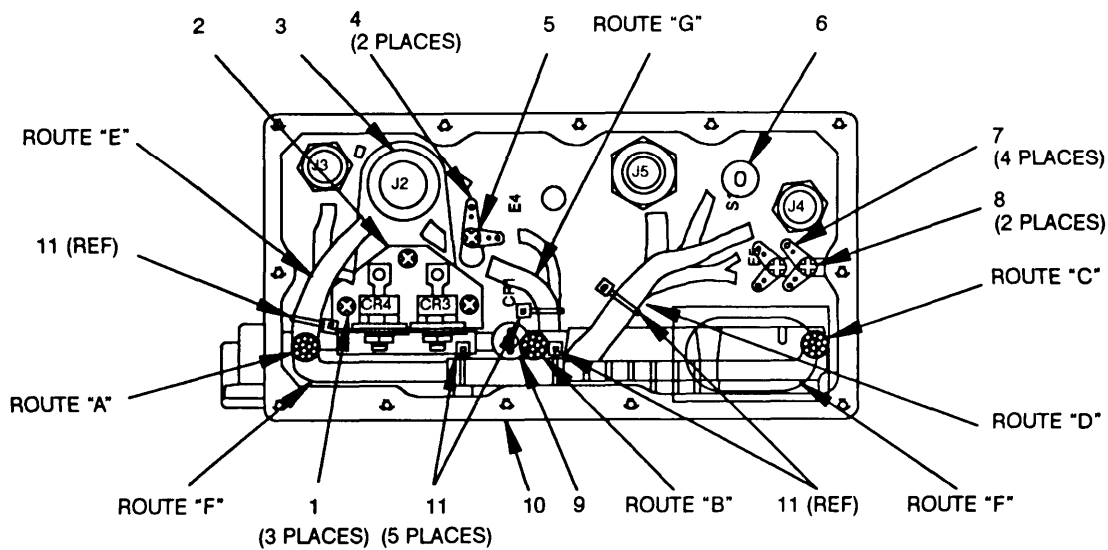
Power Supply Adapter Chassis Assembly (Bottom View) Without Heat Sink Assembly.
